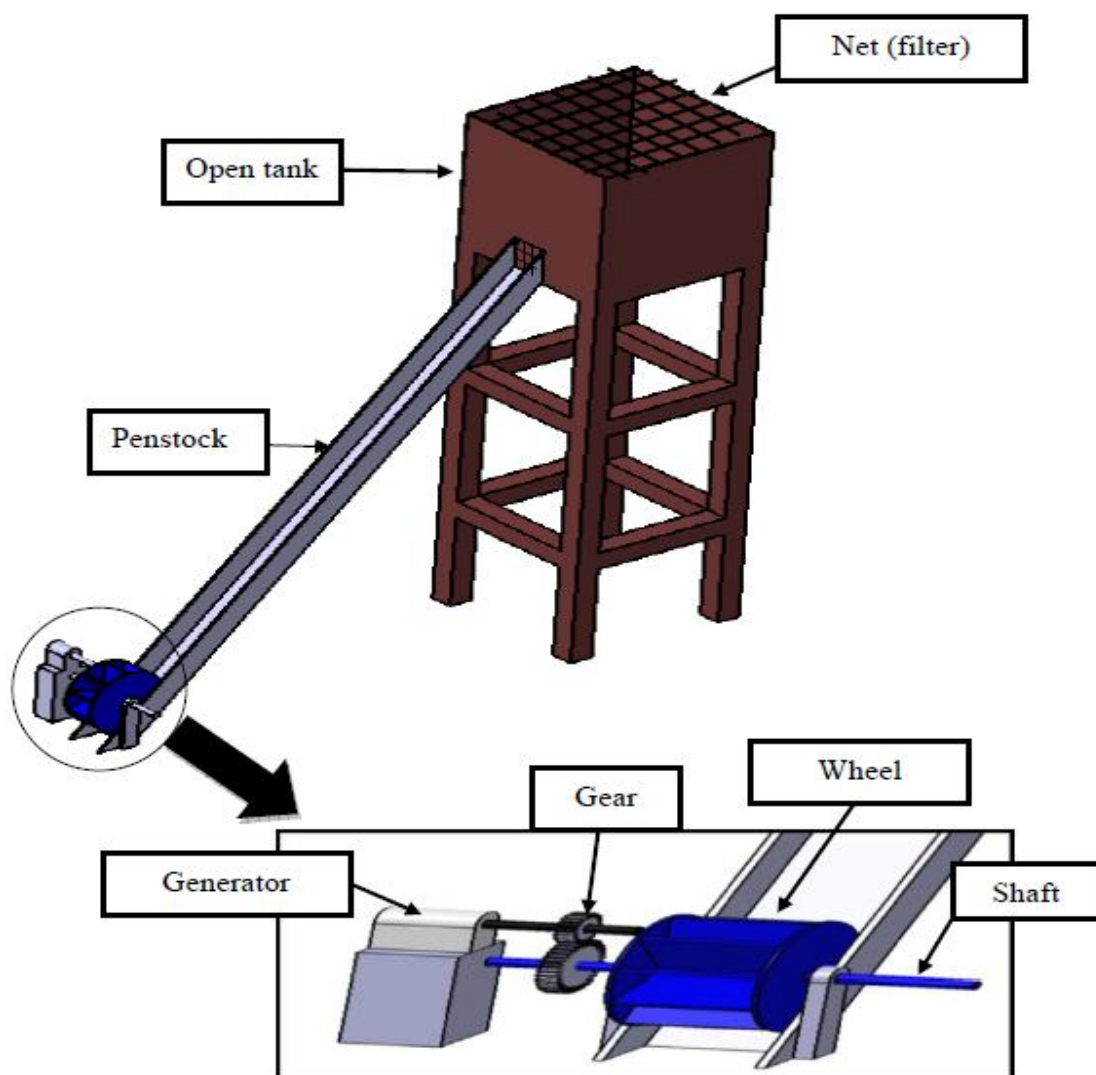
shows the labeled drawing for Pico hydro turbine design. Basically the design consists of an open tank, penstock, wheel and generator
